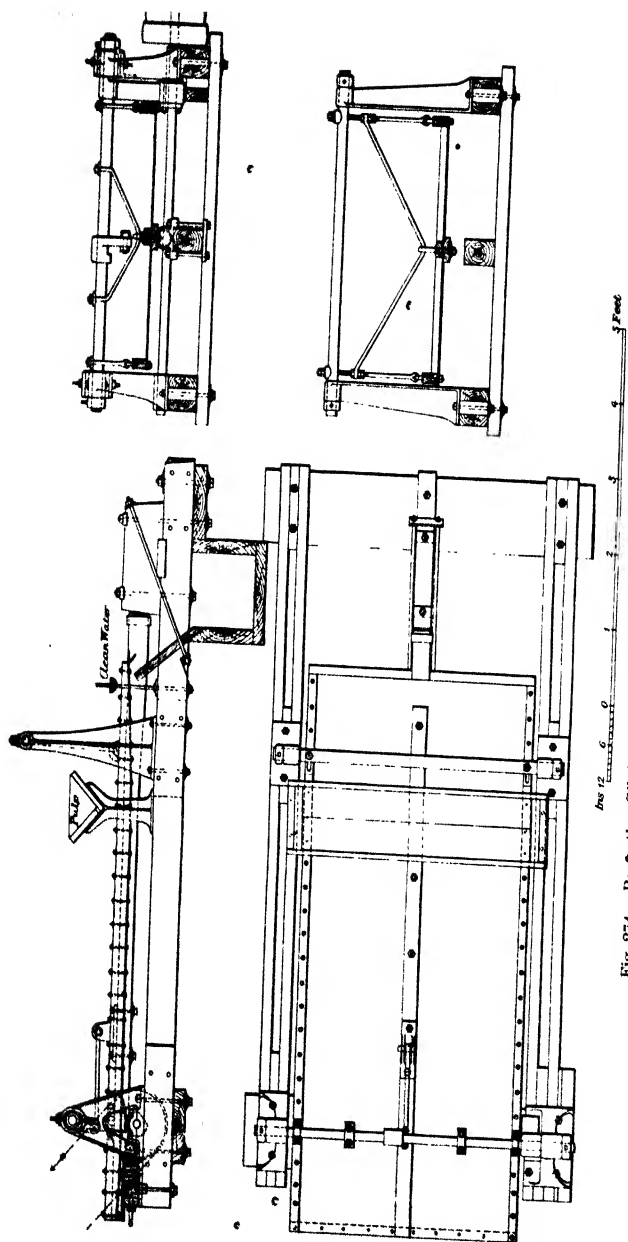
Perfection Gilpin county bumping table. Plan, side and end elevations.
